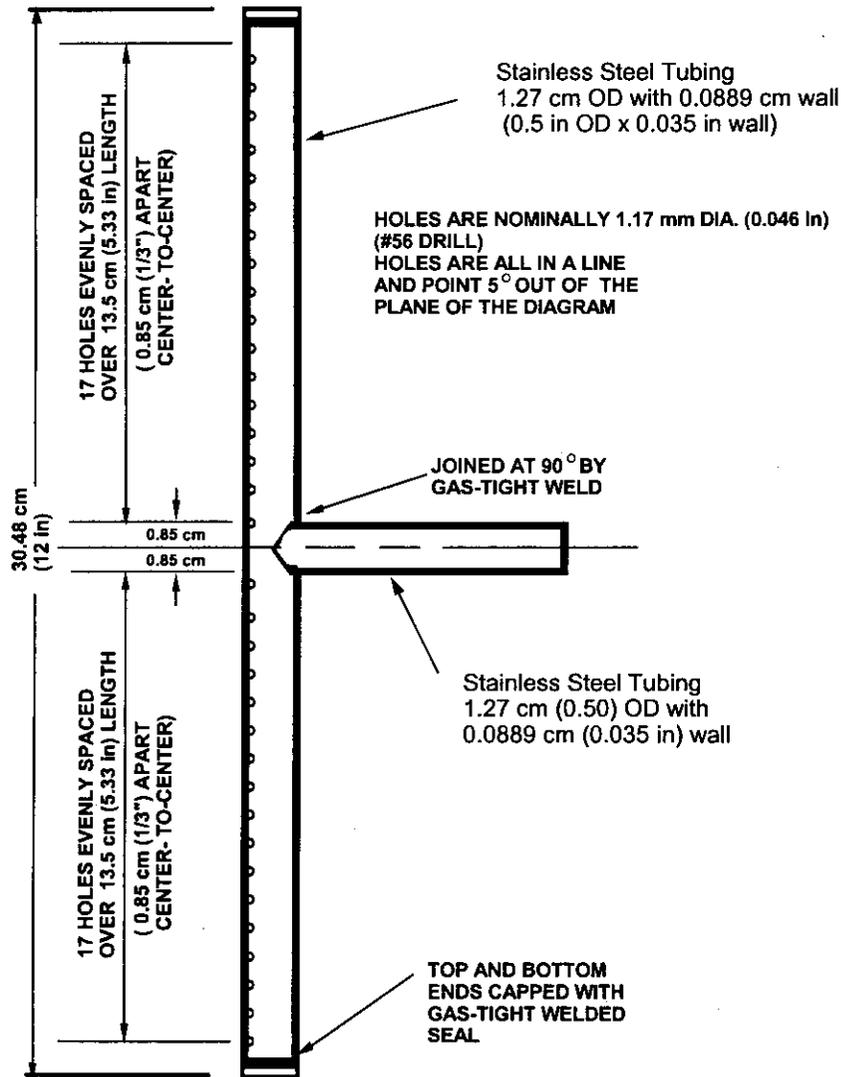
DETAILS OF HORIZONTAL BURNER HEAD.
